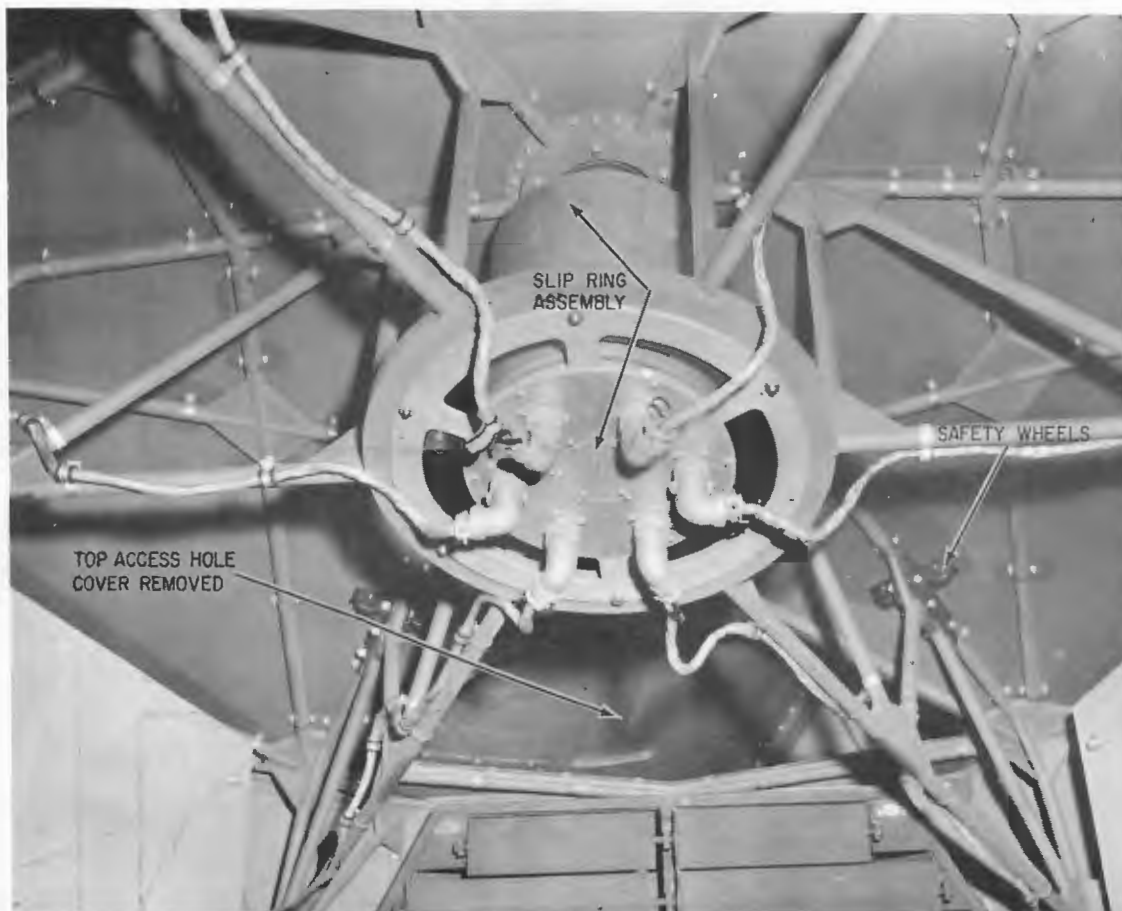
Center of scanner, showing slip-ring assembly (C-61-1)
